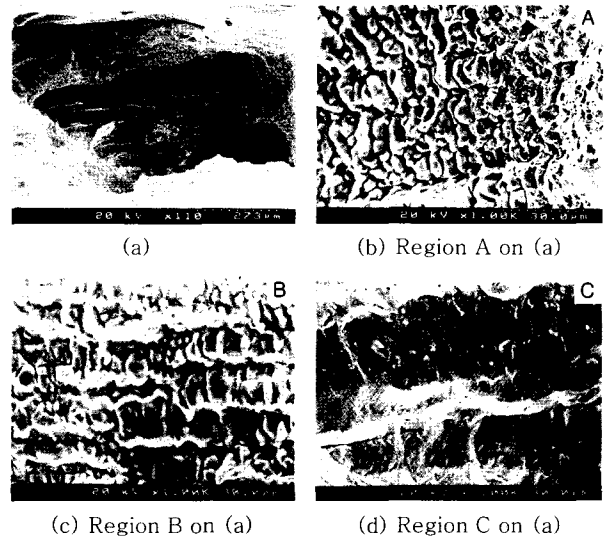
SEM microfractographs of solidification cracking surface occurred in the SA508-Inconel 690(GTAW) specimen
